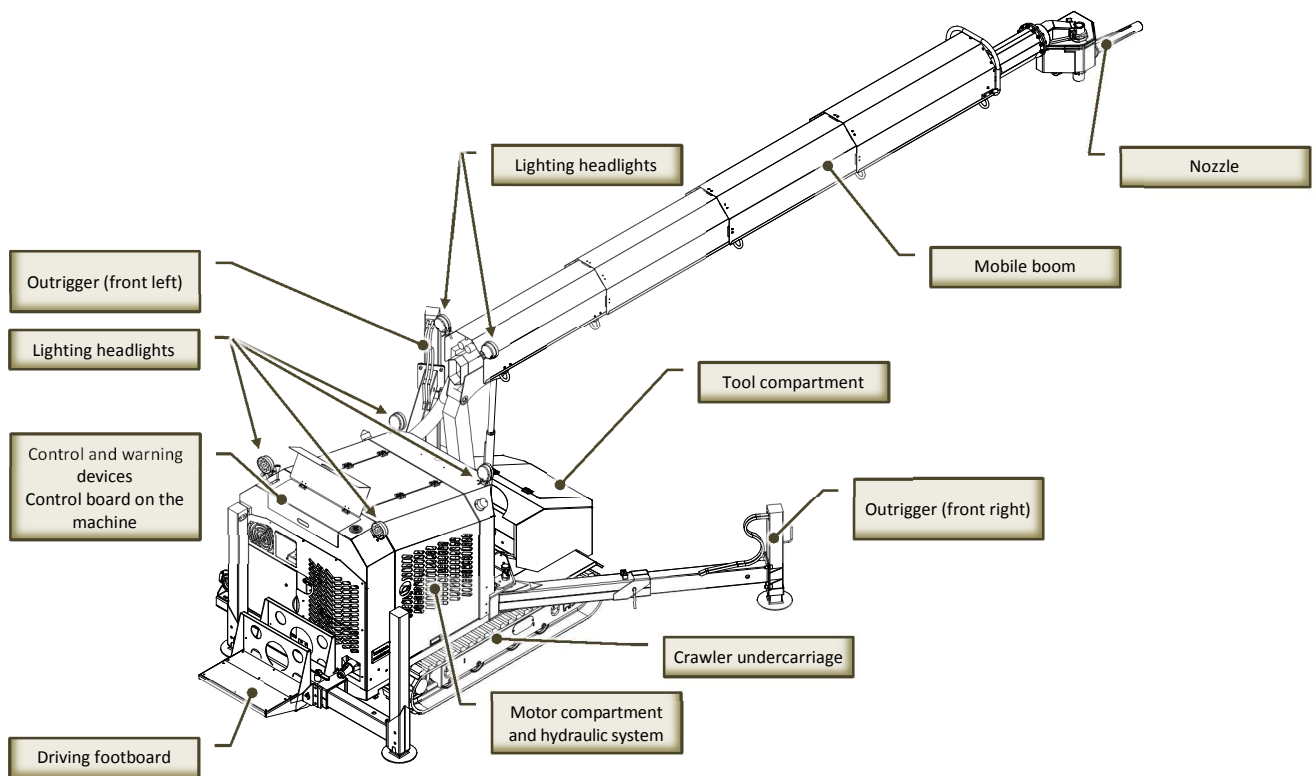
Spritzbeton mobile spraying machine (in the version with 4 outriggers)
